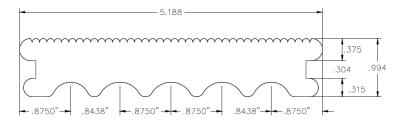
Rustic™ Deck Board - Grooved Cross Section Profile 1
